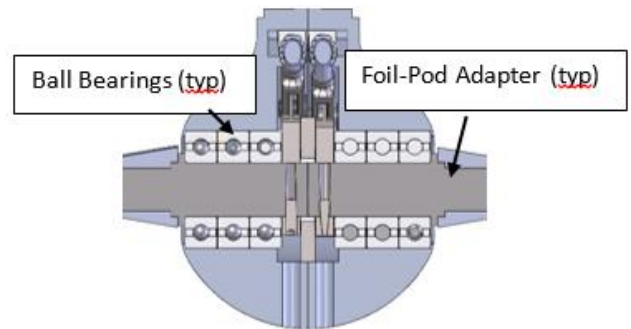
A cross sectional view of the pod showing the final design with ball bearings
